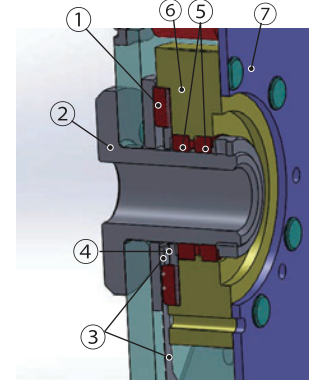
Cross-sectional view of the hollow shaft with built-in optical encoder: 1) thrust bearing, 2) hollow-shaft for wiring, 3) optical encoder and FPC, 4) 1000 CPR scale mounted to a modified thrust bearing washer, 5) bearings, 6) joint part, 7) shoulder protector plate.
